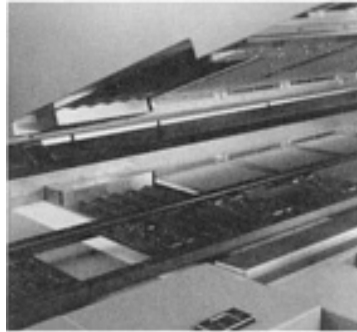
FORCED CONVECTION REFLOW SOLDERING OVEN USED TO SOLDER PWB COMPONENTS. COURTESY OF VITRONICS CORPORATION
